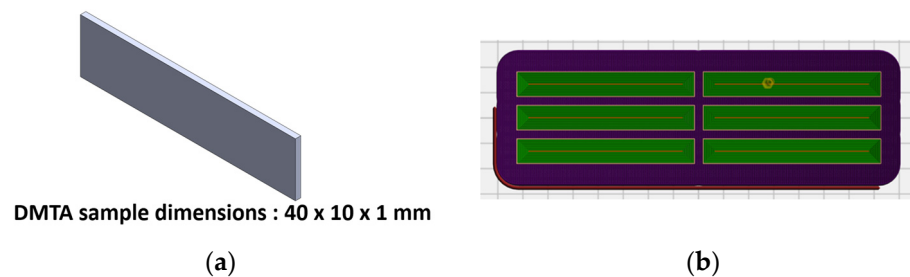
(a) Geometry of DMTA samples and (b) 3D printing preview of slicing patterns.
